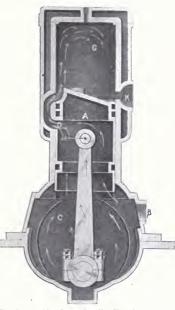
Modification of Smalley Two-Cycle Engine, with its Valve between By-Pass and Cylinder.
